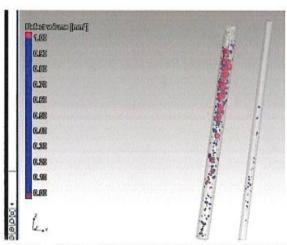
CT scan (Mg66Zn30Ca4) after casting with exhausts with lower porosity
